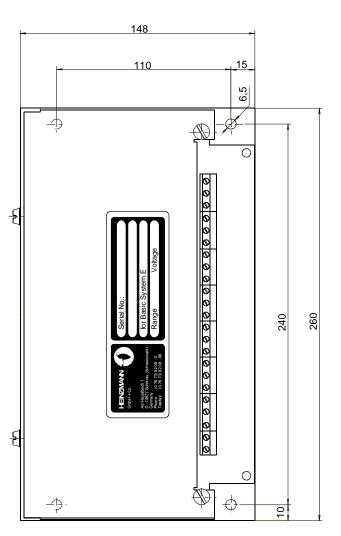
Dimensional Drawing PKG .. - 04 - 00
